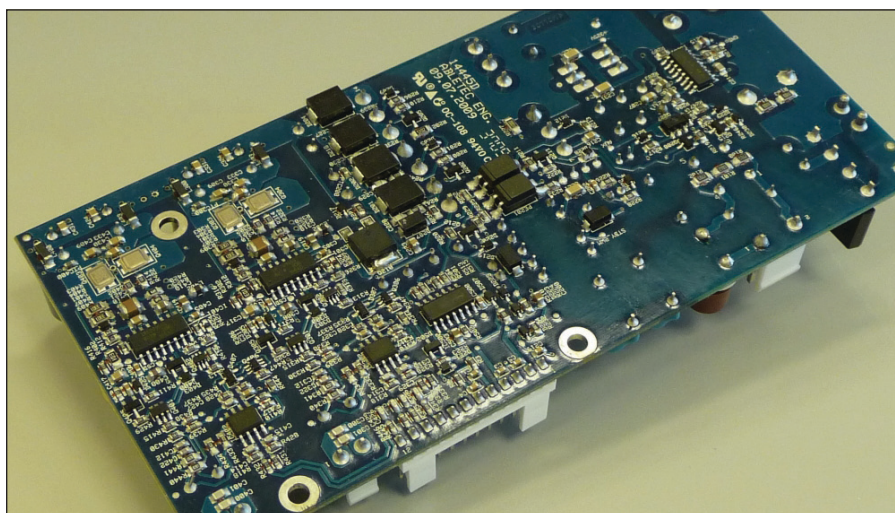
Solder side of the ALC0180-2300 board using SMD throughout
